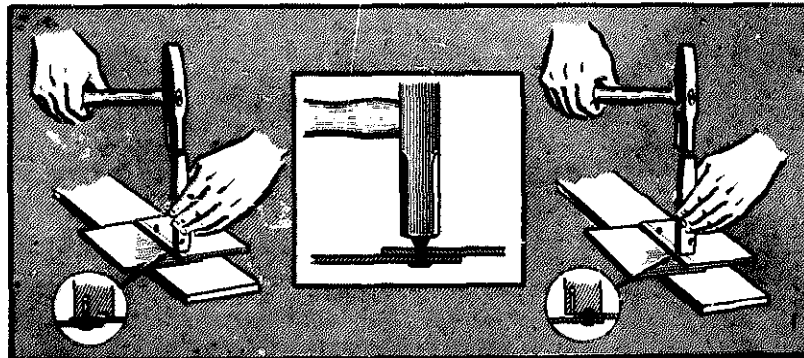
Drawing, upsetting, and heading a rivet.
